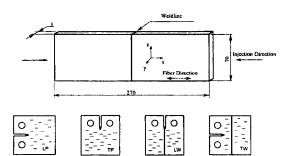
Layout and dimensions of injection mold and extraction of CT specimen
